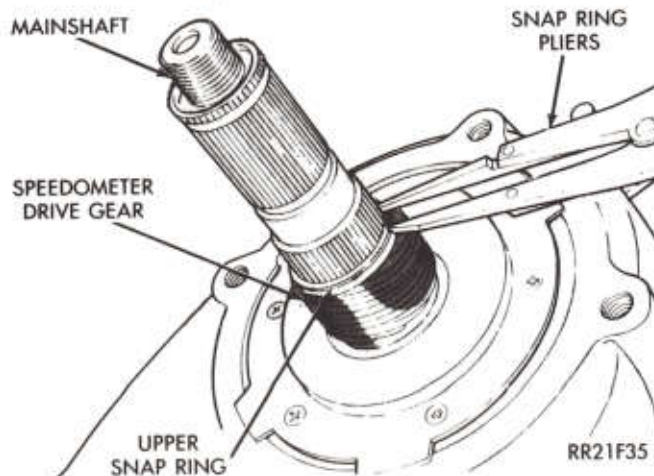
Upper Snap Ring And Speedometer Drive Gear
